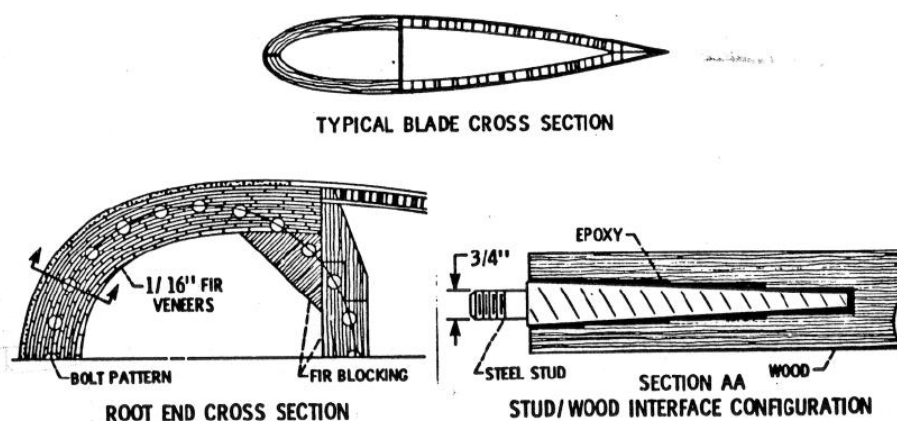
Laminated wood/epoxy MOD-0A blade construction details [13].
